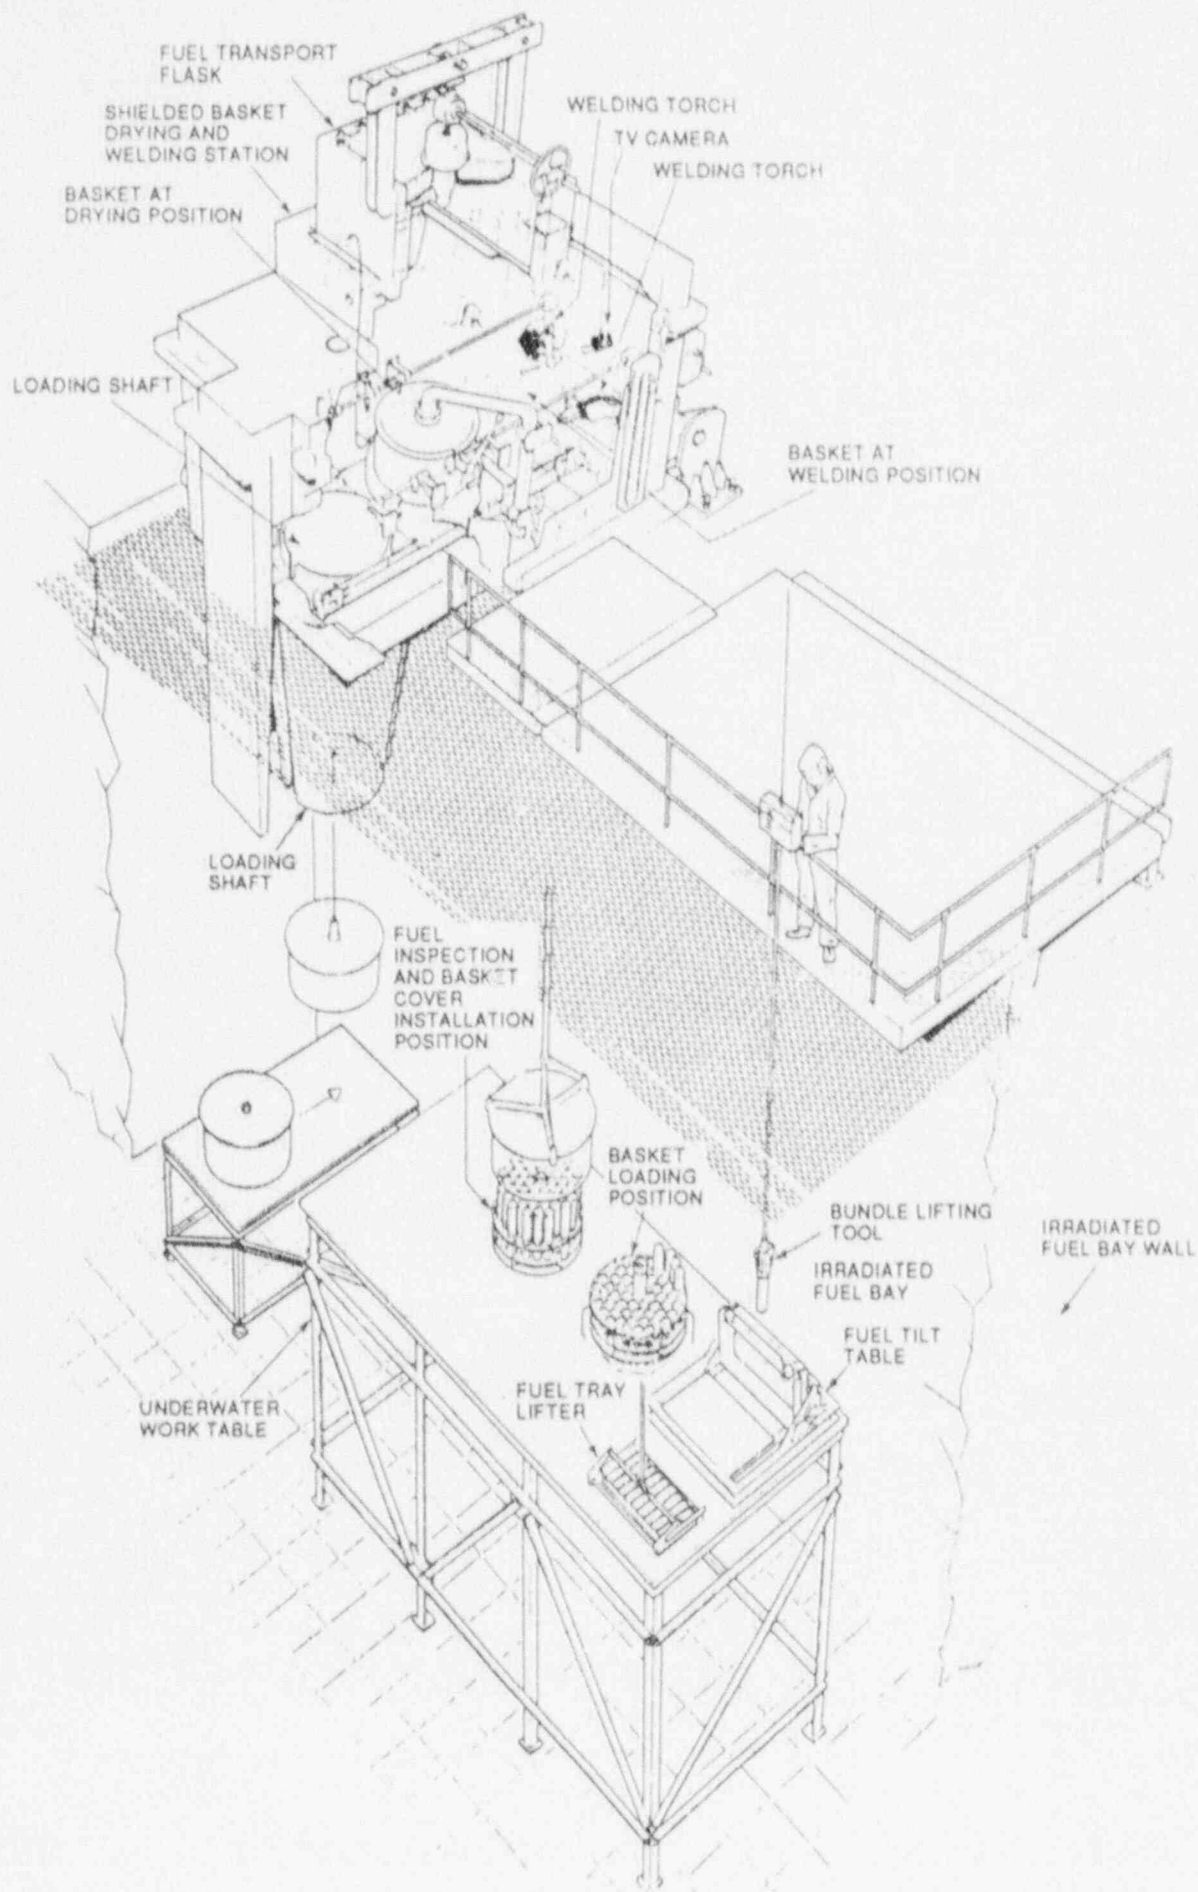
DRY STORAGE BASKET LOADING EQUIPMENT
